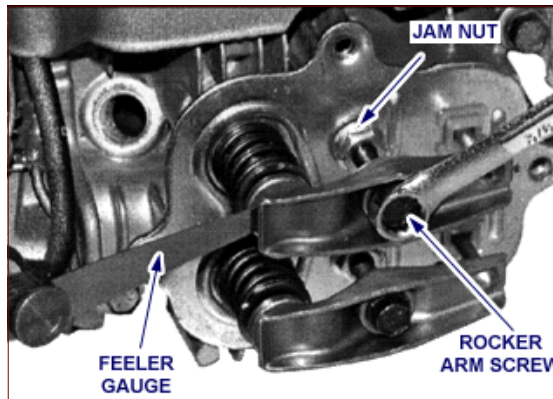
Adjust Rocker Arm Clearance, Early Style
